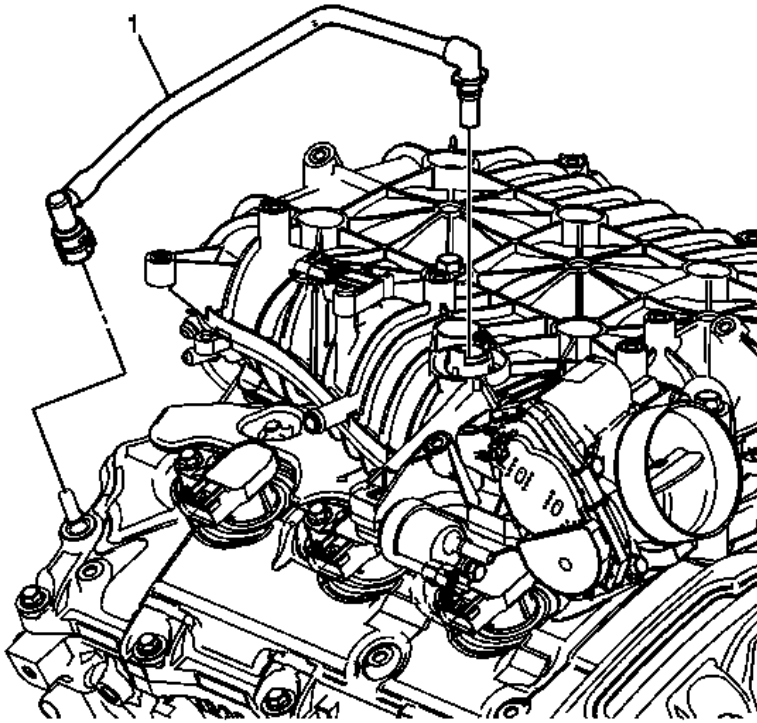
Positive Crankcase Ventilation Tube Replacement - Rear
